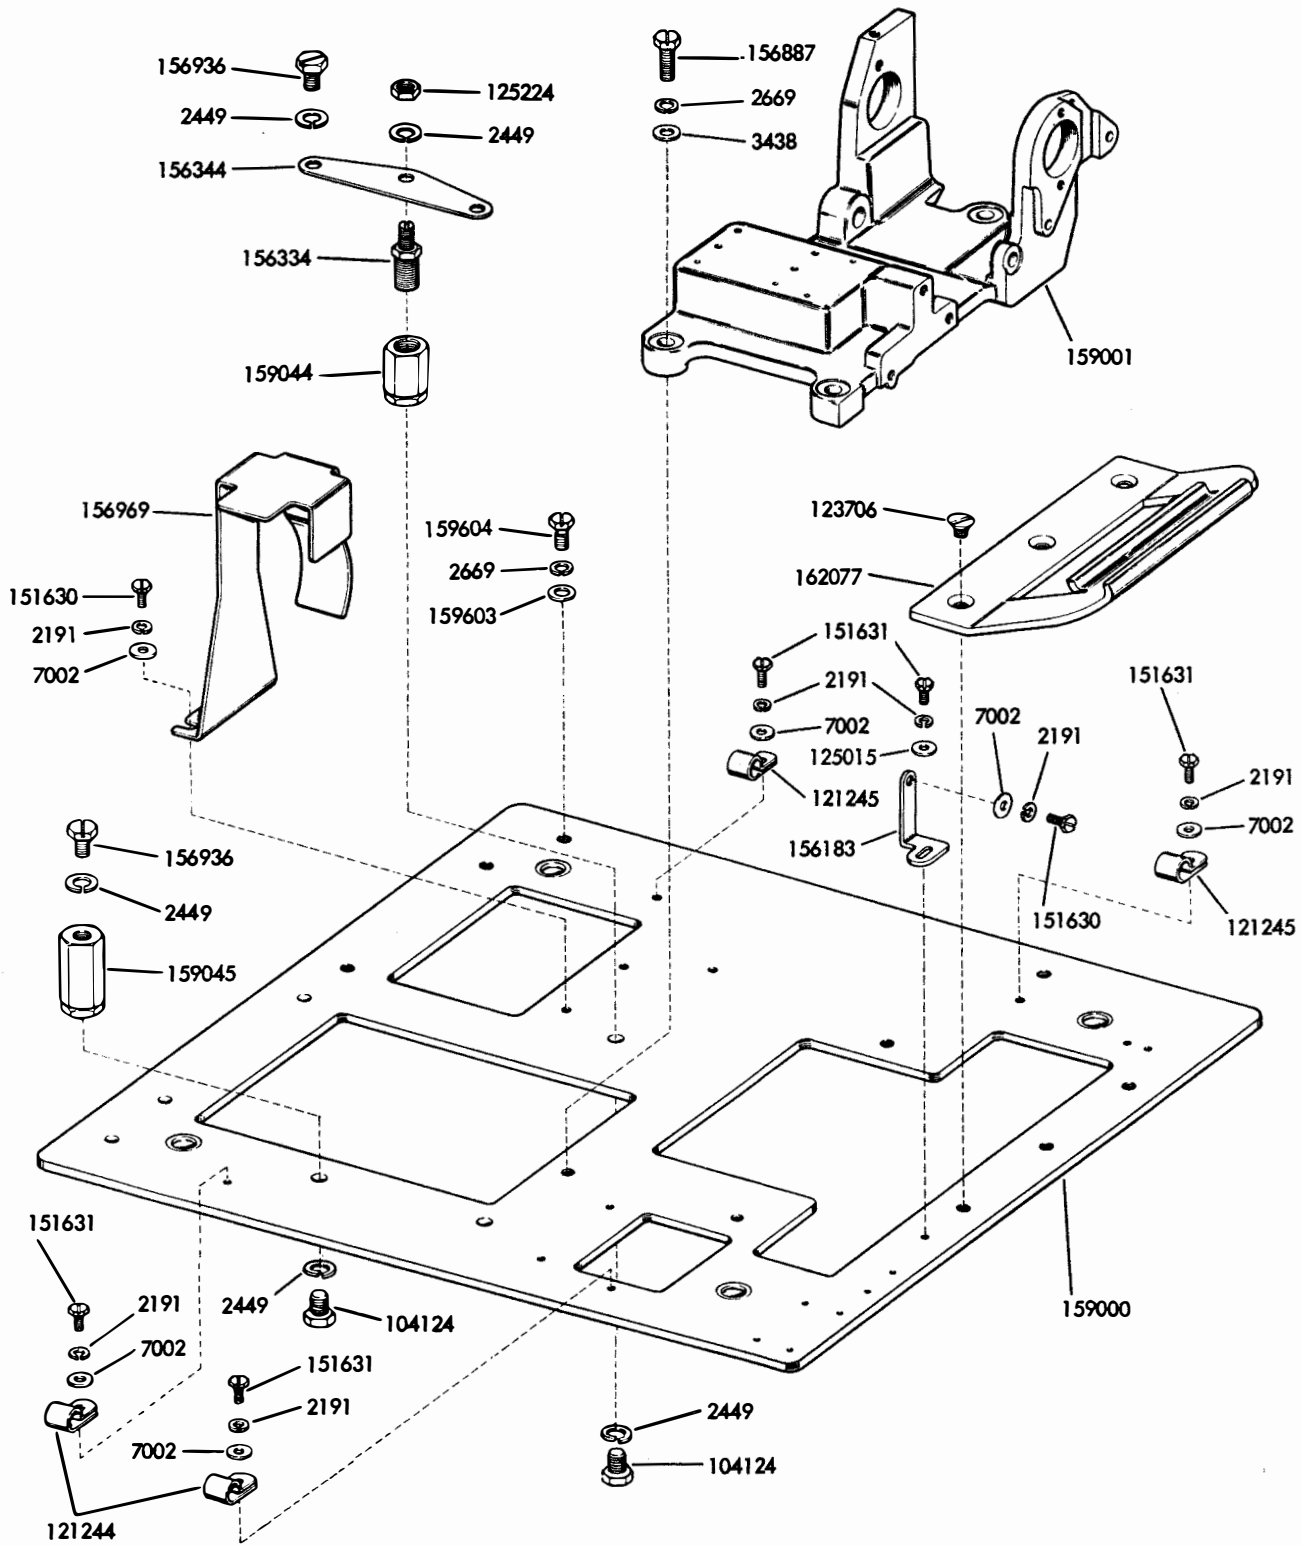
BASE ASSEMBLY - VIEW 2
